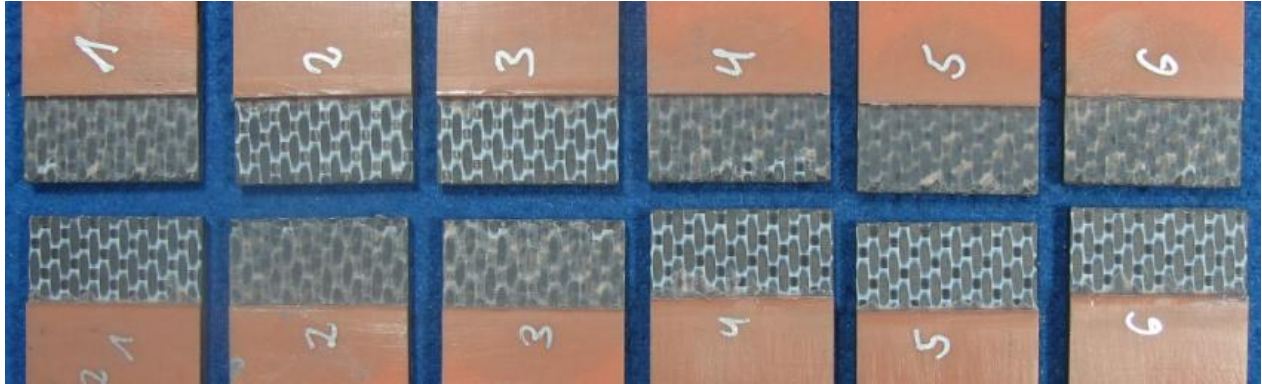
Fracture pattern DCB -APP- hotwet-75°C bonded with a) EP\_1, b) EP\_2 and c) PU
